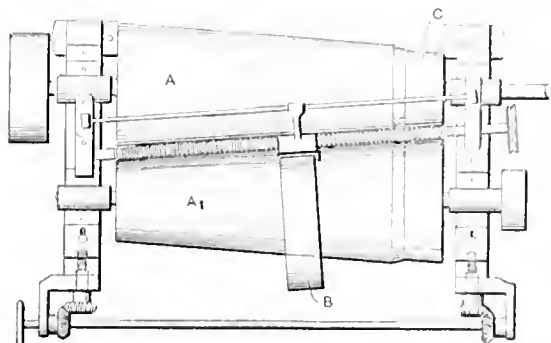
Patent No. 374,296, Granted G. Frank Evans, 1887
